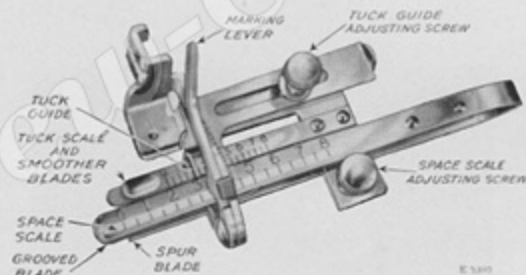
THE TUCKER AND ITS WORKING PARTS
